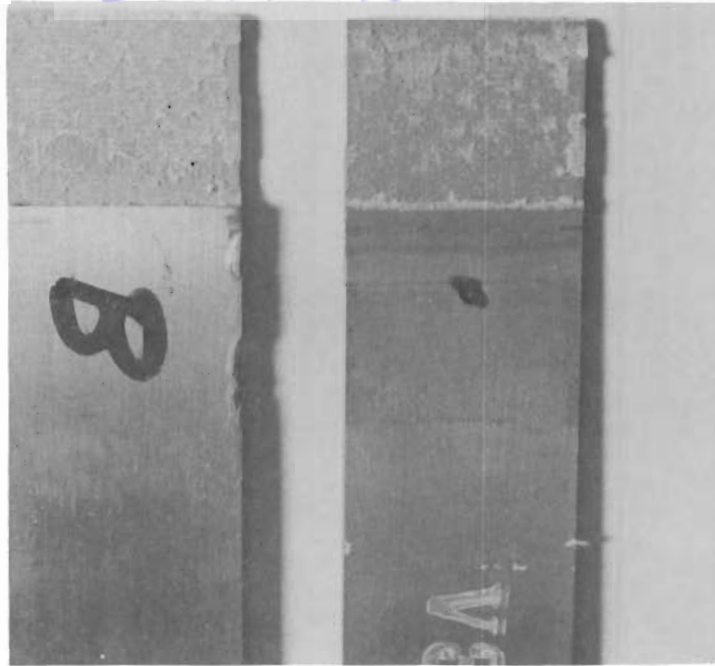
TYPICAL STATIC FAILURE SURFACE
